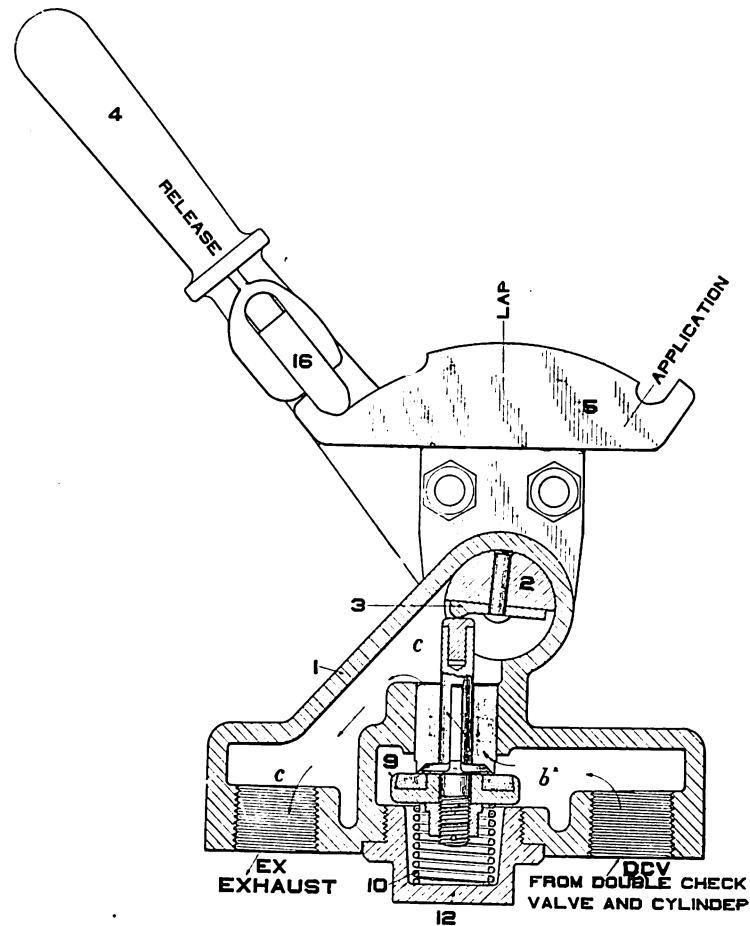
Cross Section of S-3 Straight-Air Brake Valve in Release Position
